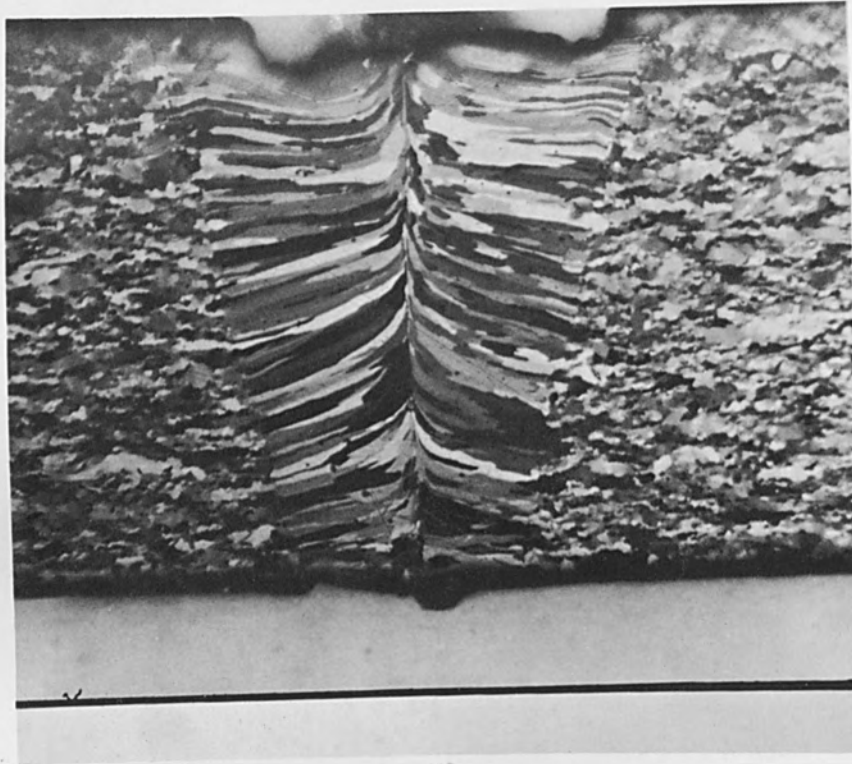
Weld Cross-section in 0.040-in. Beryllium
